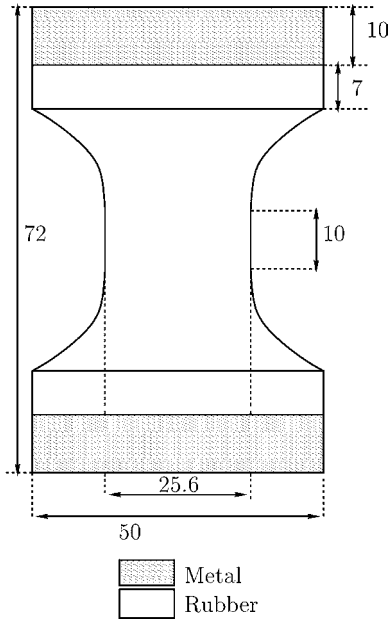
Specimen geometry used for fatigue tests (dimensions in mm).
